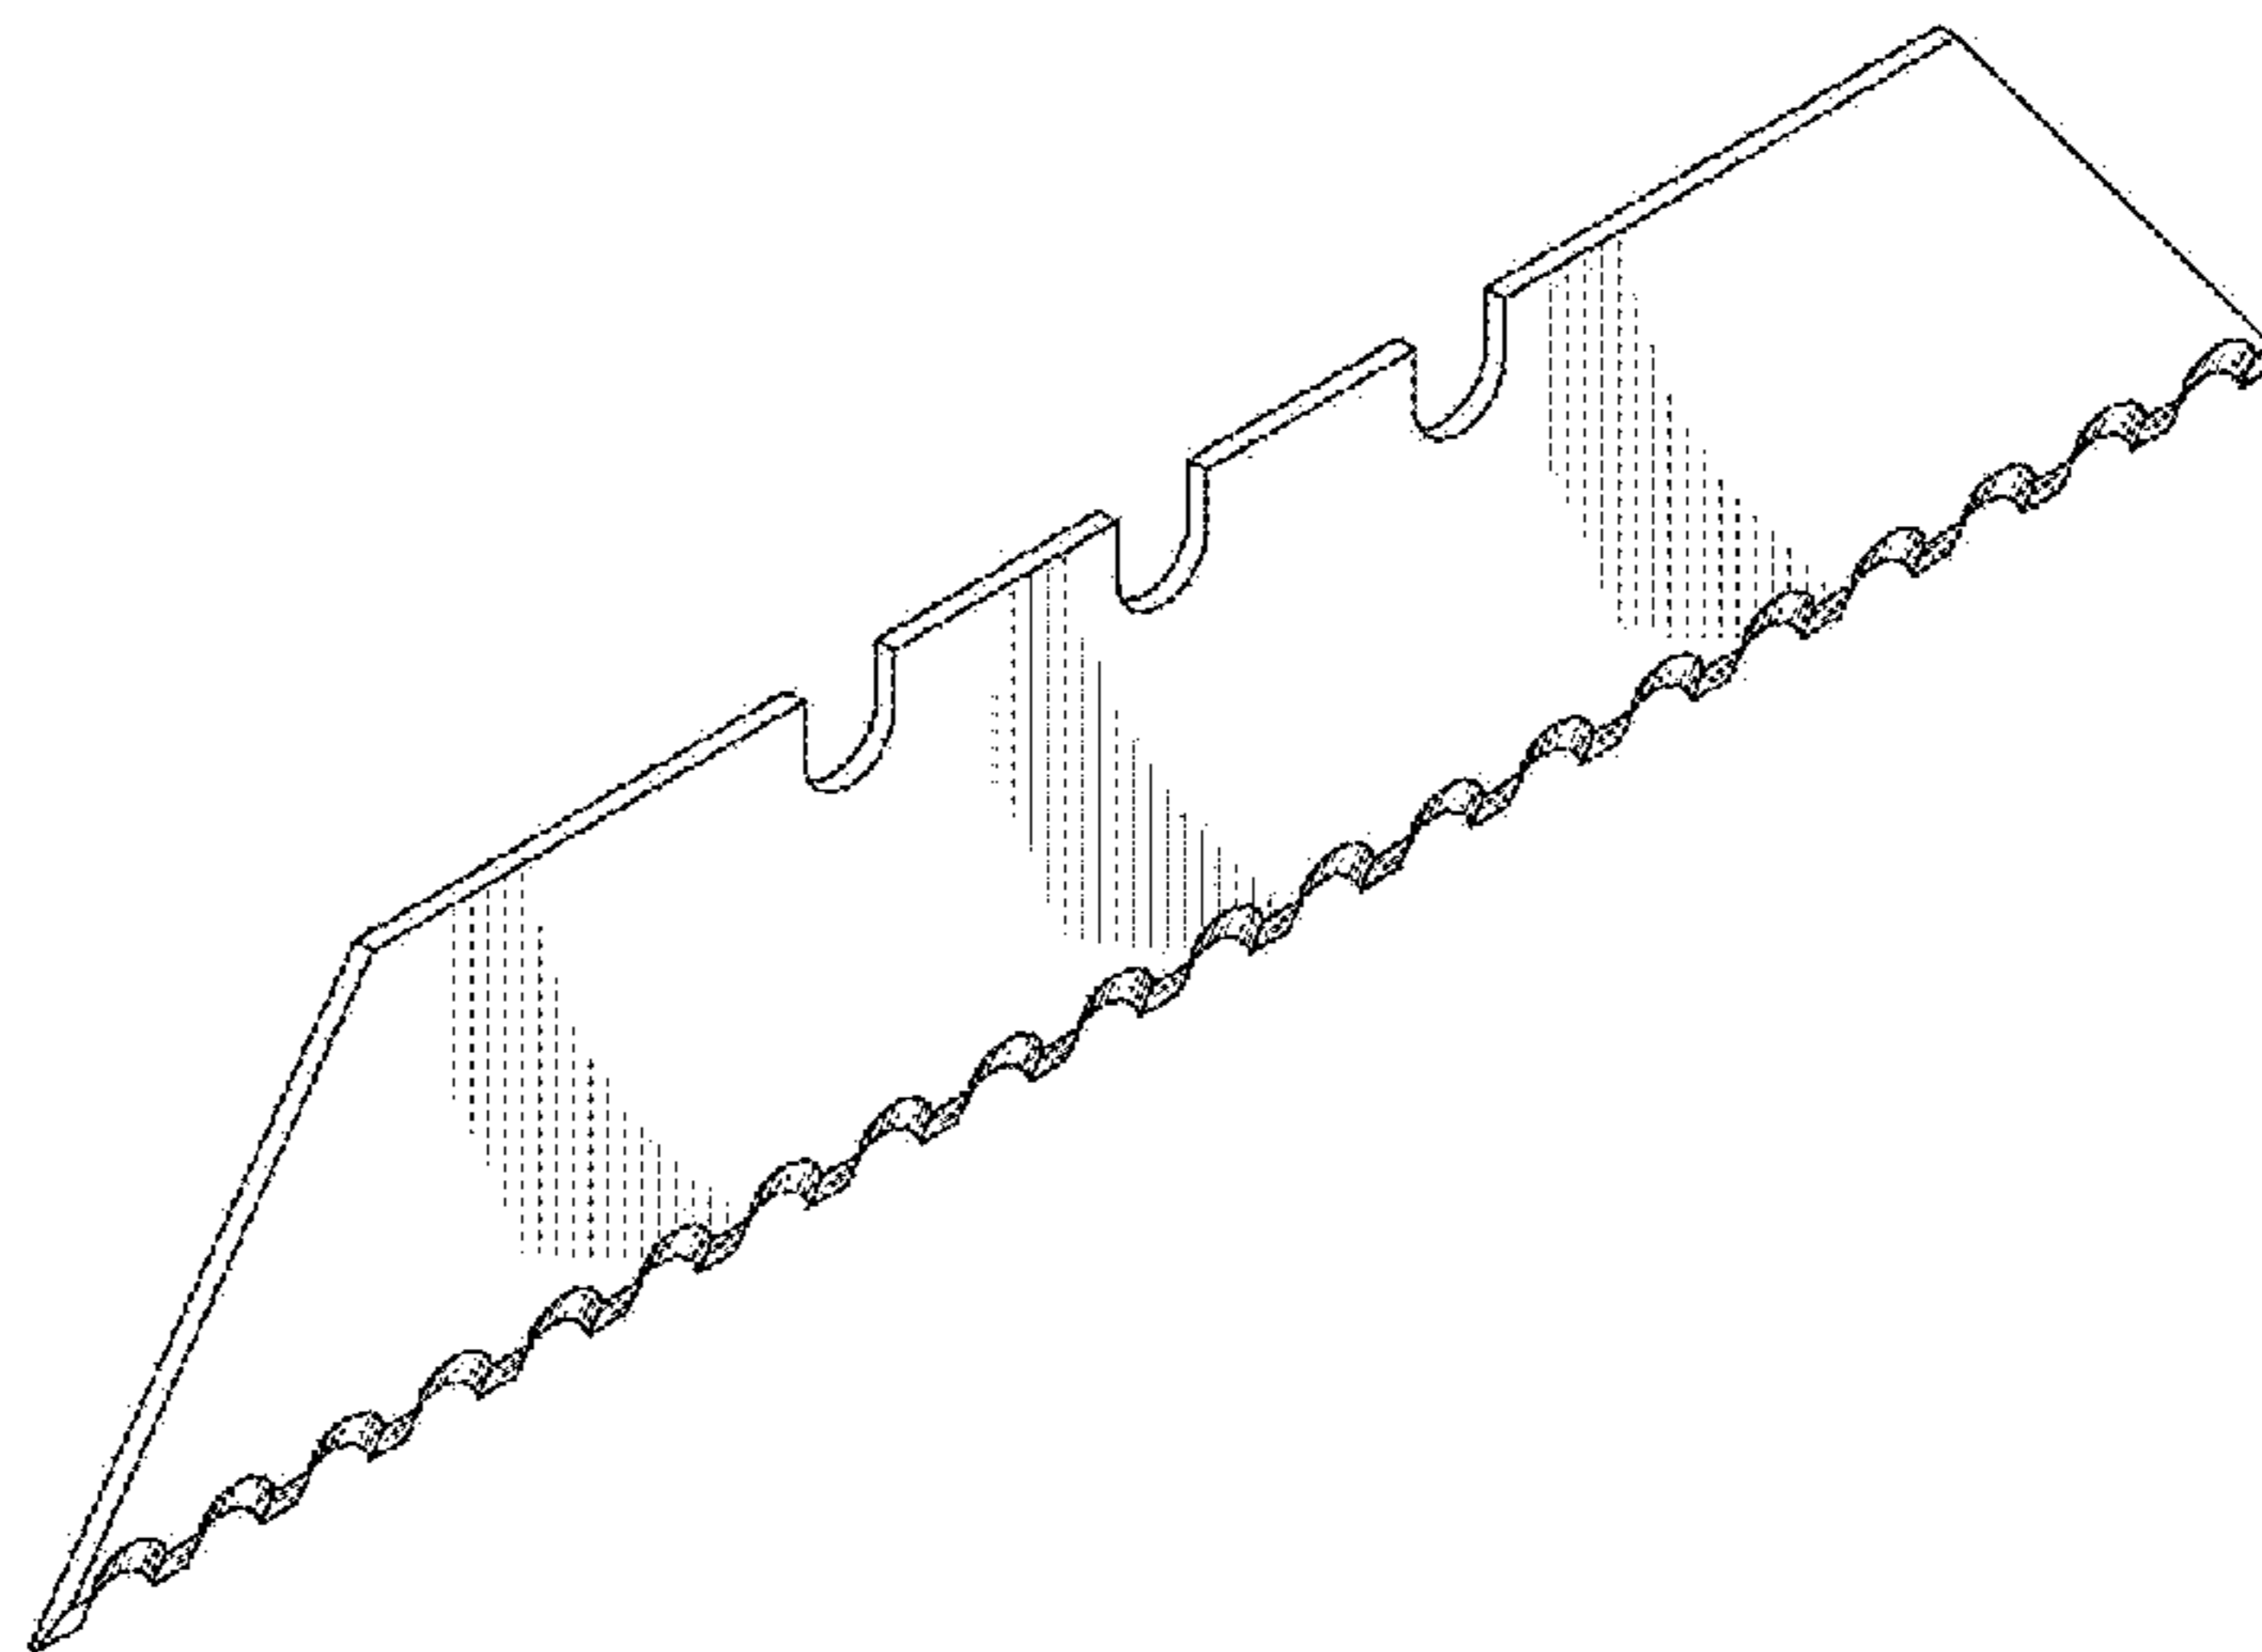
is a perspective view of a first embodiment of a cutting blade showing my new design;
